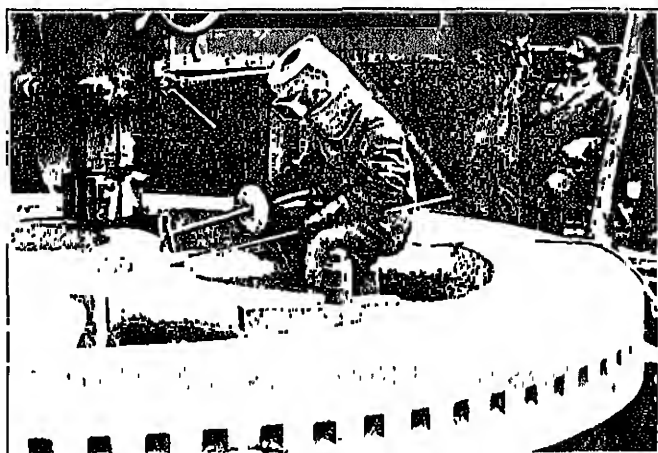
Correct Welding Position when Using Carbon Arc and a Filler Rod.
